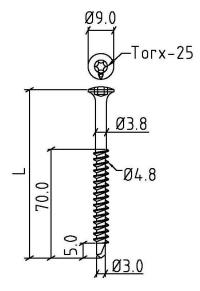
BS 4.8 Screw for fixing in steel sheets
